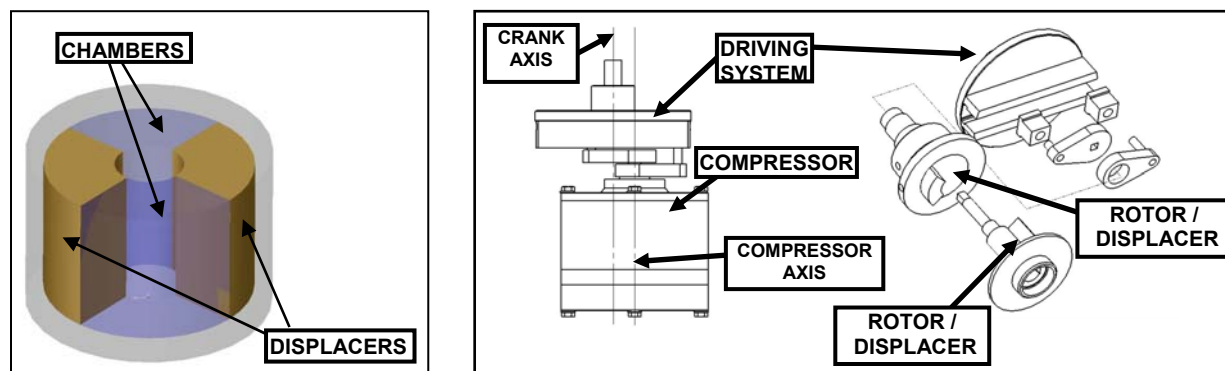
a) Schematics of the compressor. b) Overall and exploded view of the proposed compressor with its driving mechanism.
